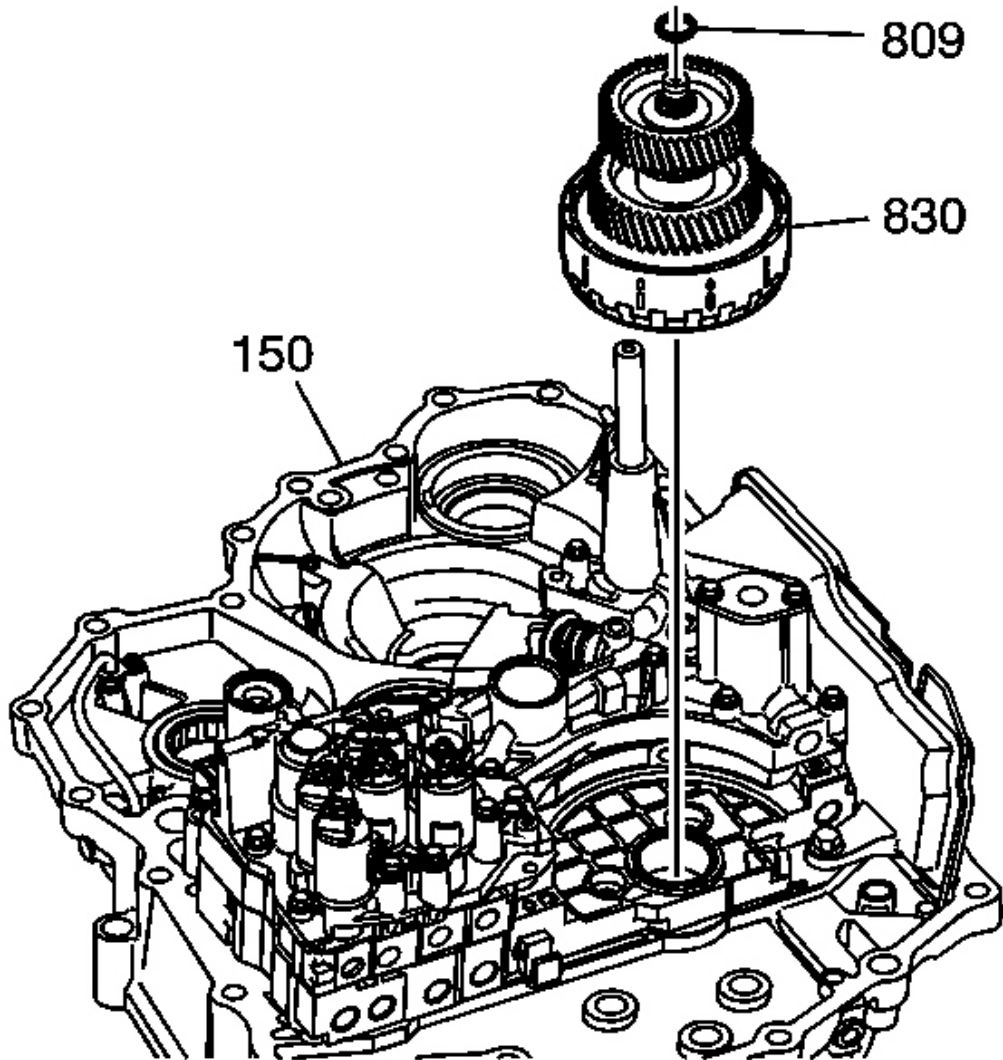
Selective Washer, 3rd Clutch Assembly & Torque Converter Housing
